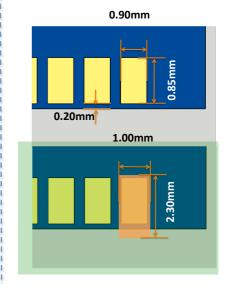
Dimension of BGMS BOTTOM LGA pads and recommended user client mounting pads
